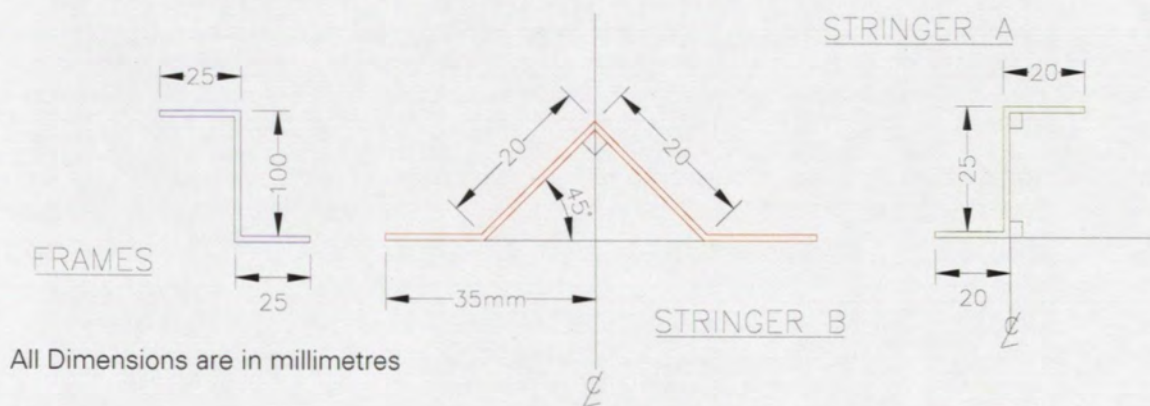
Frame and Stringer Arrangement for Stylised Fuselage Panel
